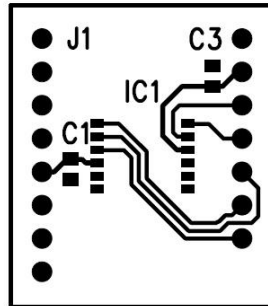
SCA8X0/21X0/3100 PWB Top Layer Layout.
